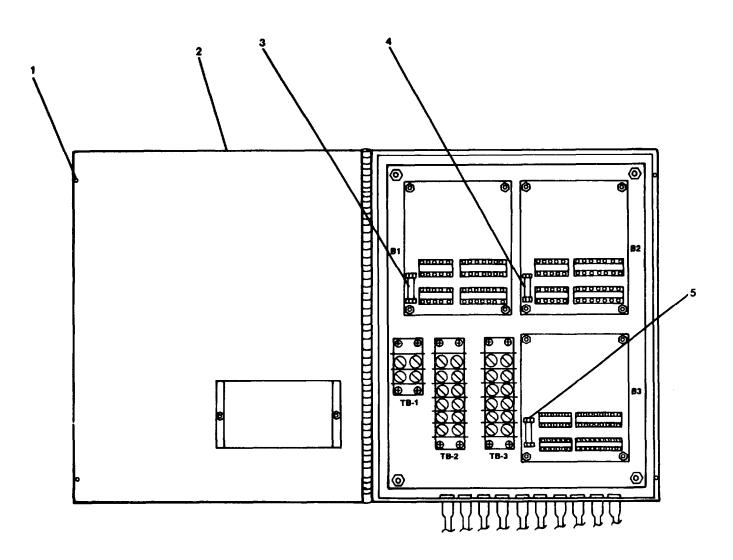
Analog Remote Module Assembly (Repair).
